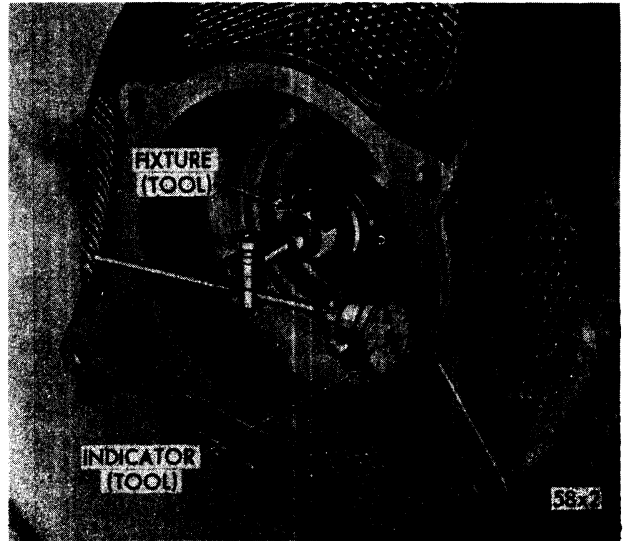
Checking Face Runout (Typical View—Housing for Air Cooled Converter Shown)
